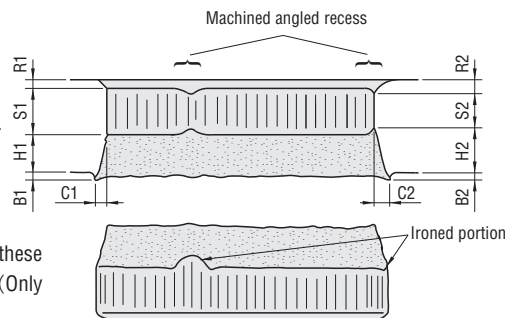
Shear plane shape due to die with countermeasures for scrap retention
